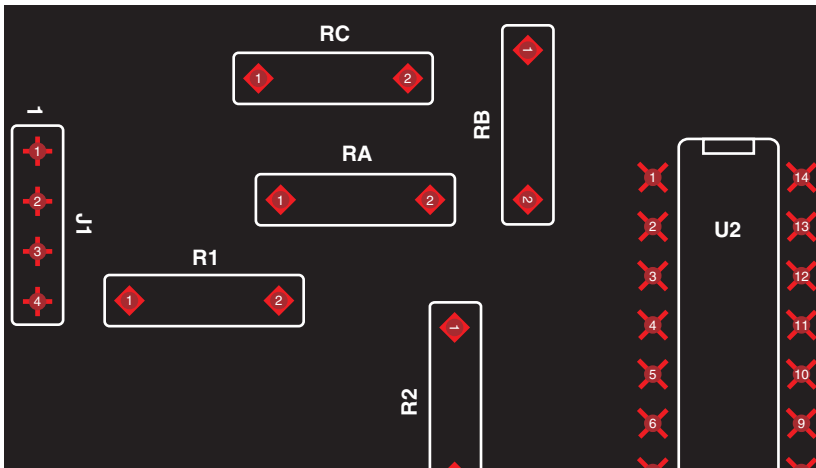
Circuit layout with drill identifiers and silk screen on a PCB.
